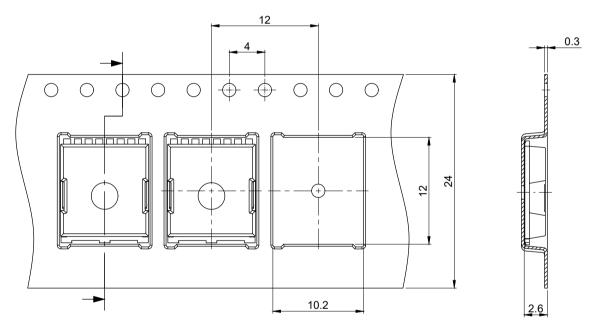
Packaging variant PG-HSOF-8, dimensions in mm
